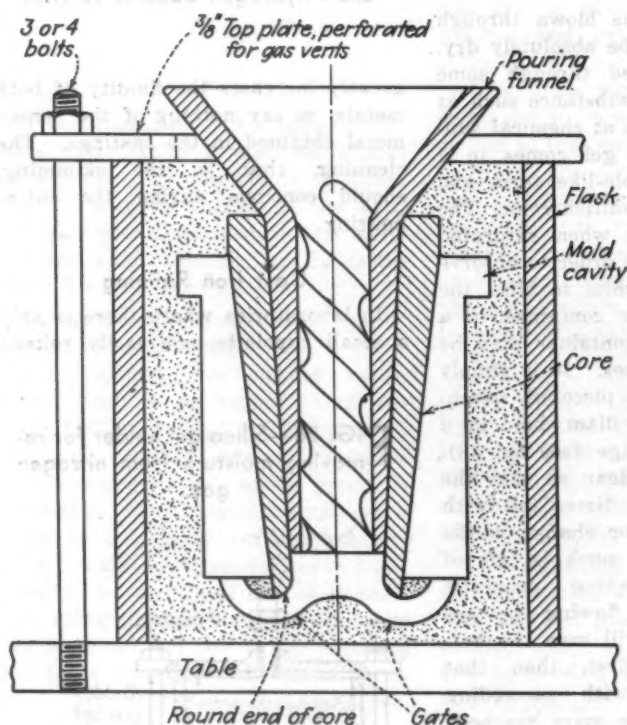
Centrifugal casting of iron bearing in which the central and vertical core serves partly as a sprue.
